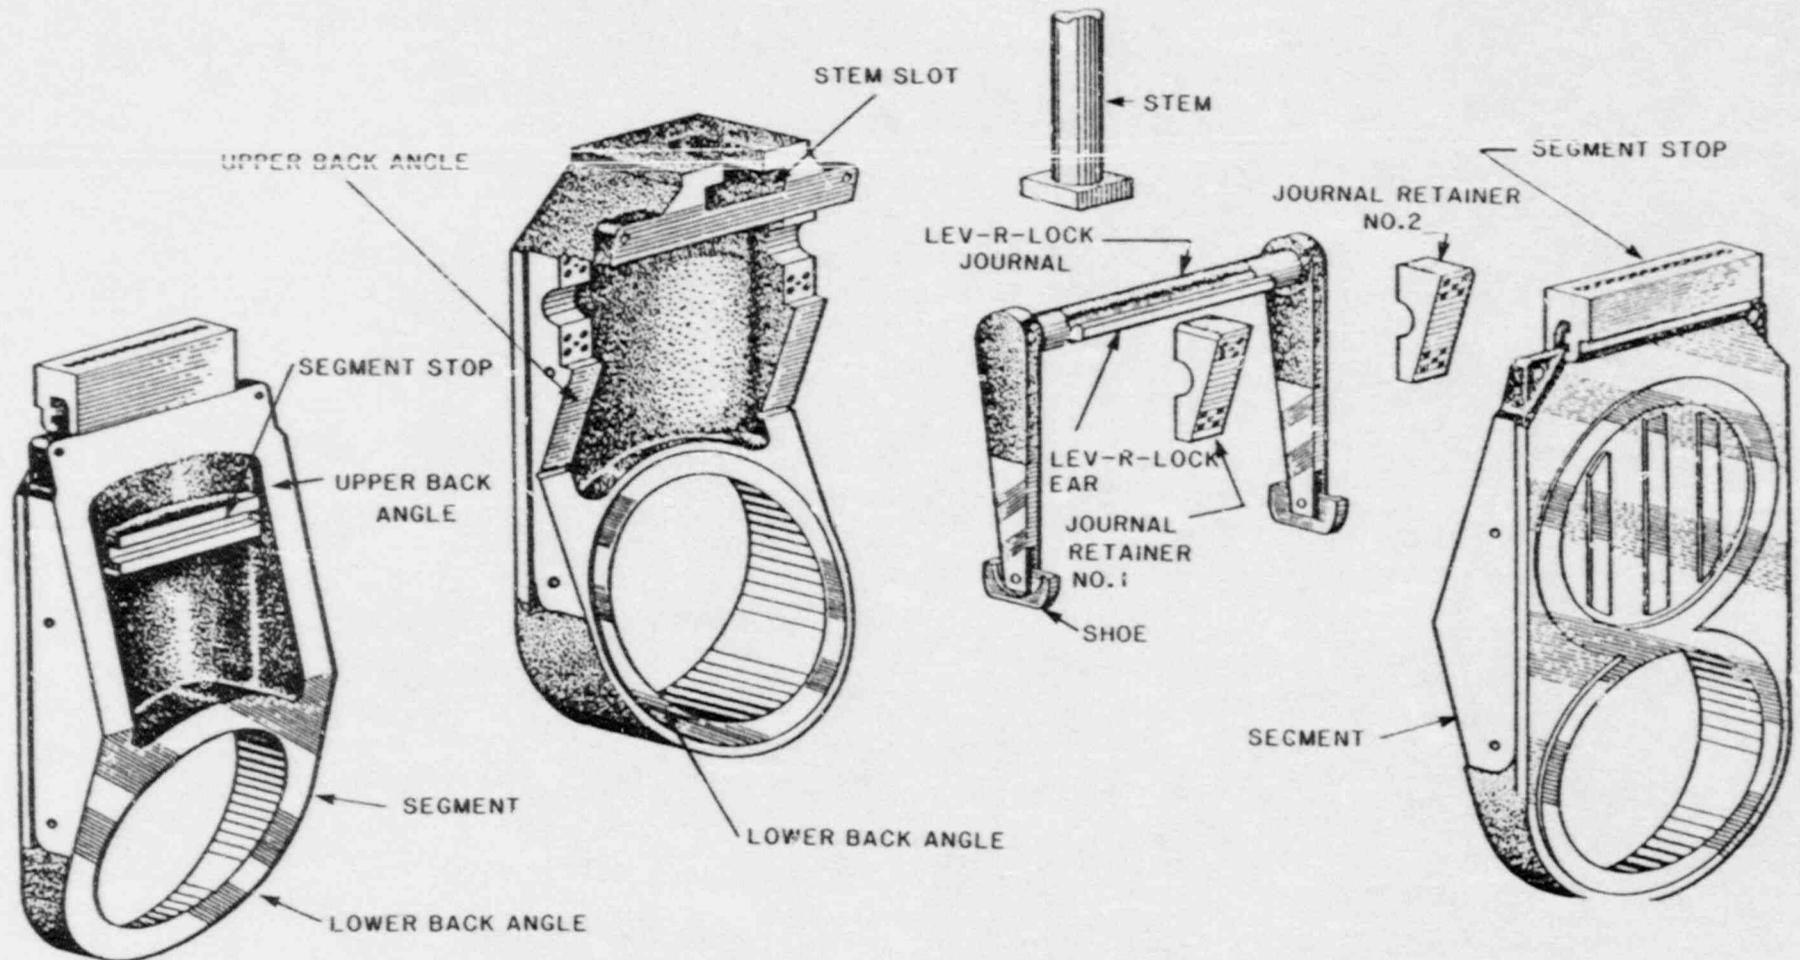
GATE AND SEGMENT ASSEMBLY DETAIL
